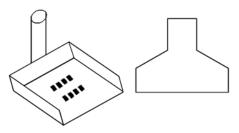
Manual Solder Printing Stencil and Mini Squeegee
